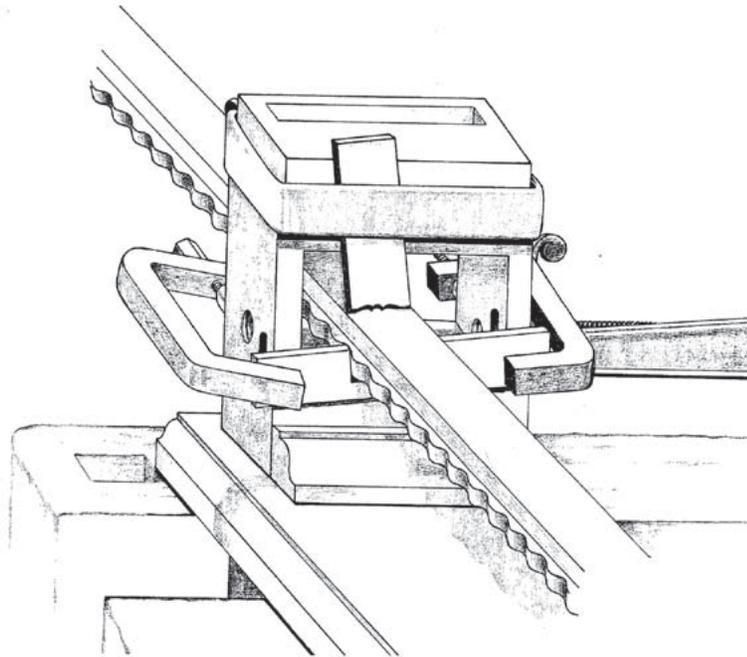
Detail of cutter-head and slide-board clamped into the end-vice of a cabinet makers workbench. The device is set up to make a side-to-side (*flammeleisten*) waveform molding. (drawing by Thornton)
